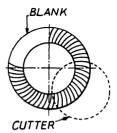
CUTTER AND BLANK ON SPIRAL BEVEL GEAR
